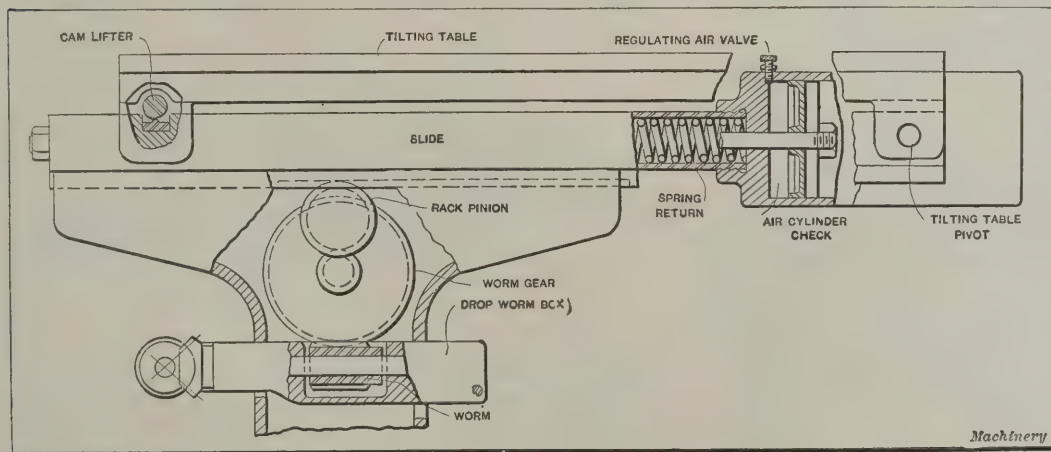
Feeding and Quick-return Mechanism of Garvin Machine
